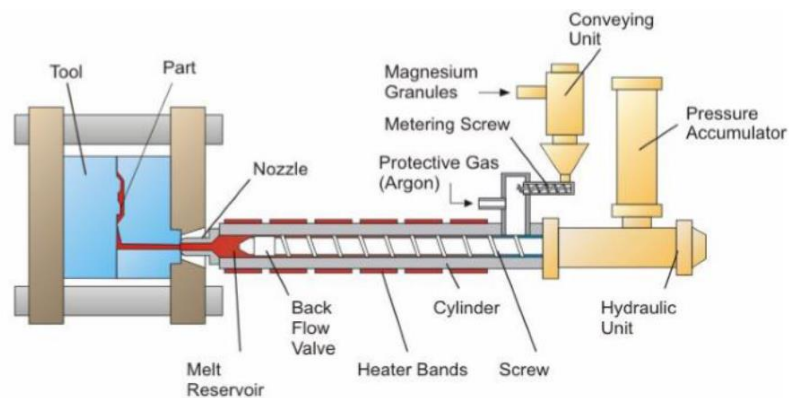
Schematic Drawing of Thixomolding® Machine (*Kainer, K. U. (ed.), 2003*)
